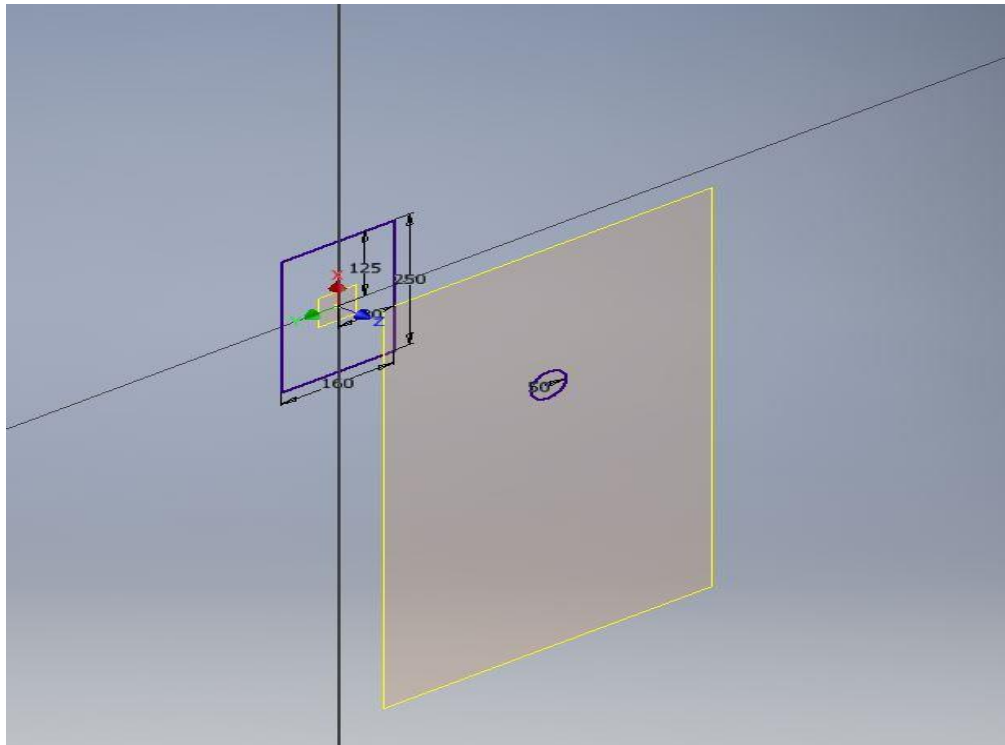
Drawing of the Inlet diffuser-transition piece of the second chamber
